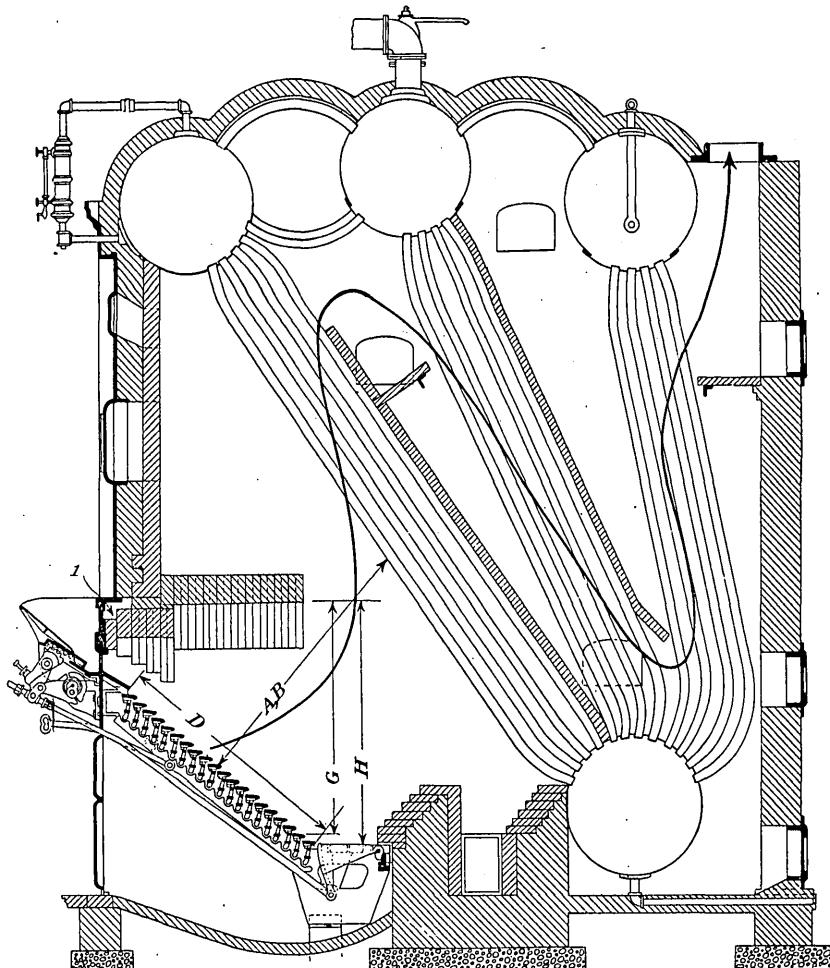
Front-feed stoker and Stirling boiler. 1, Air space; steam jets enter furnace at this point.
